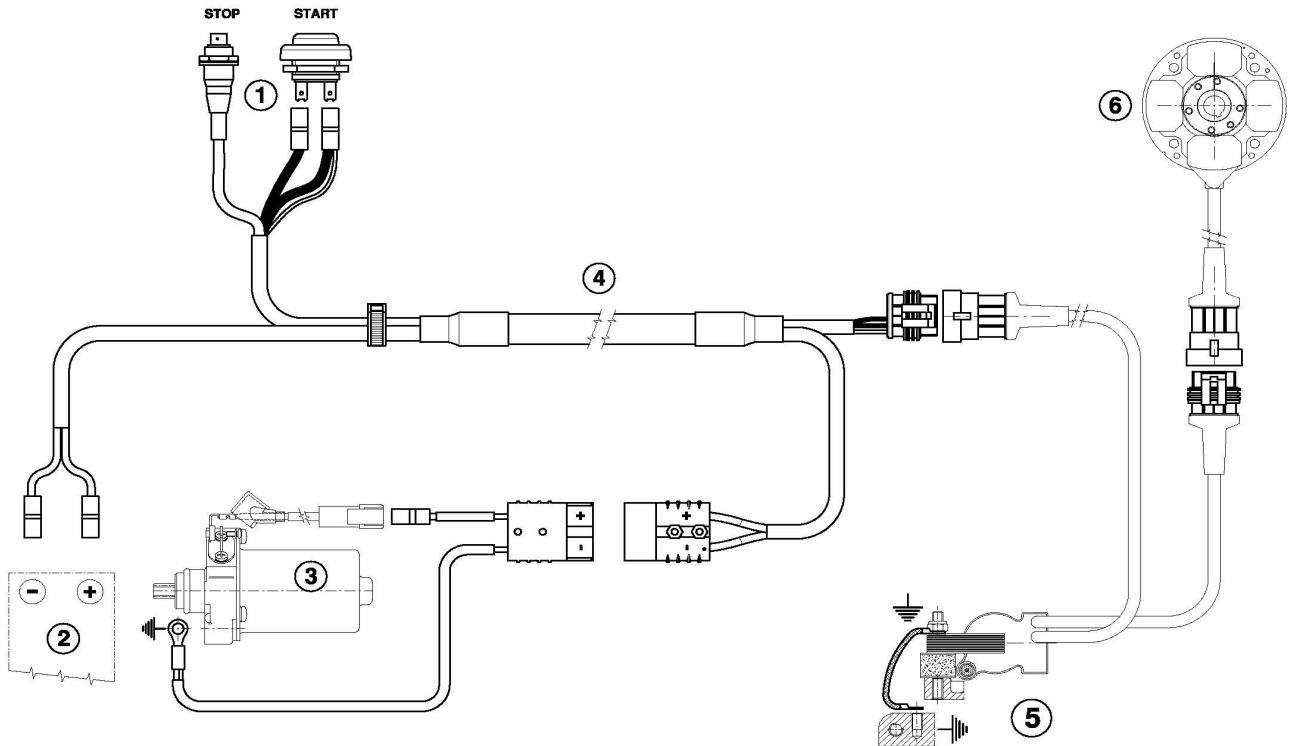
PHOTO COMPLETE ALTERNATIVE WIRING LOOM
